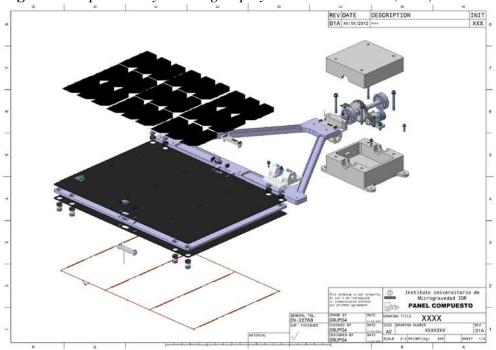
Top Assembly Drawing Deployable Panels Module (TAD)
